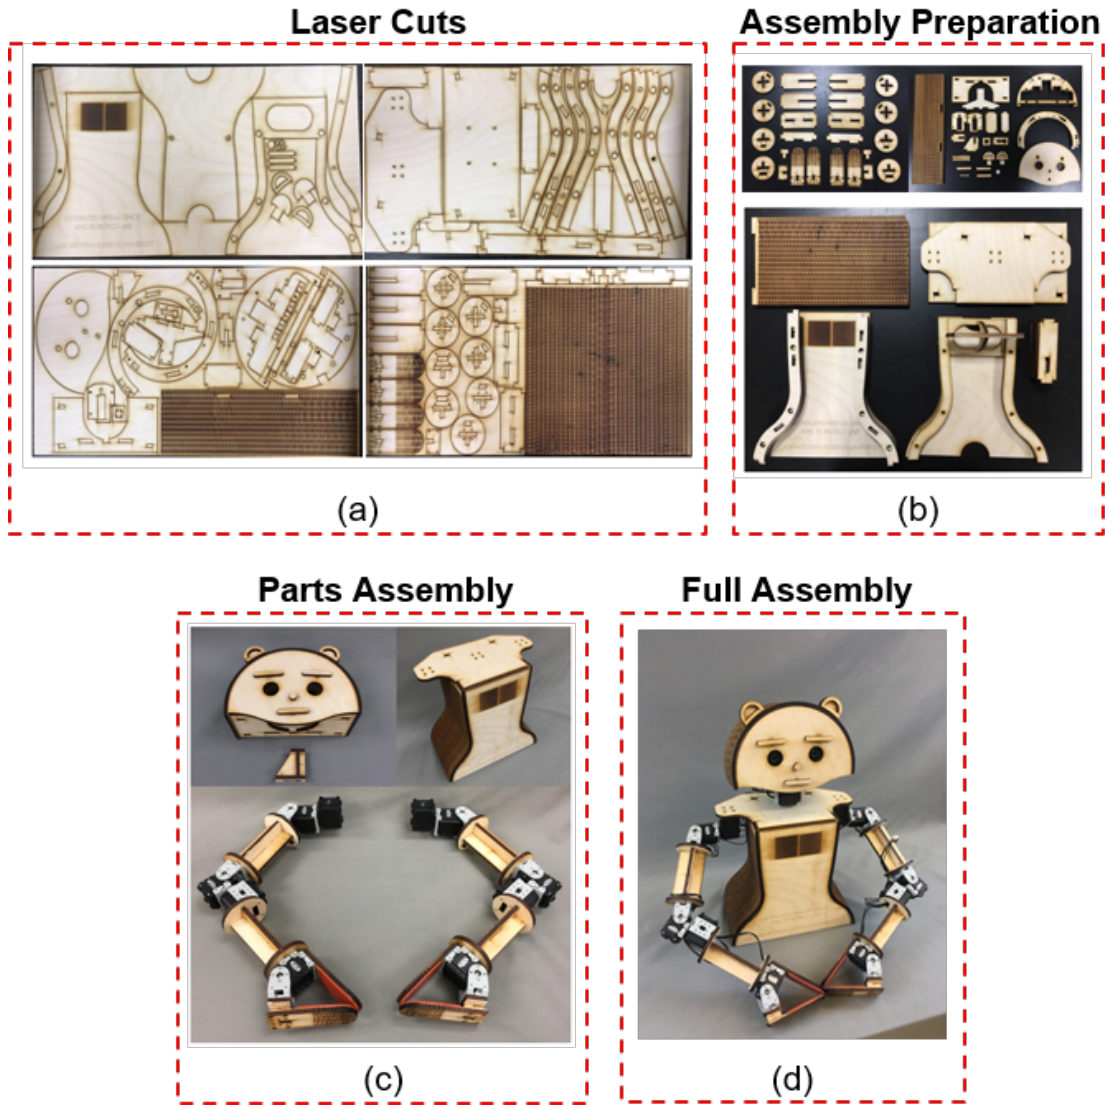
Basic assembly guide: start with wooden sheets, laser cut (a), remove pieces (b), glue subassemblies, fasten together (c), add electronics and fully assemble Woody (d).
